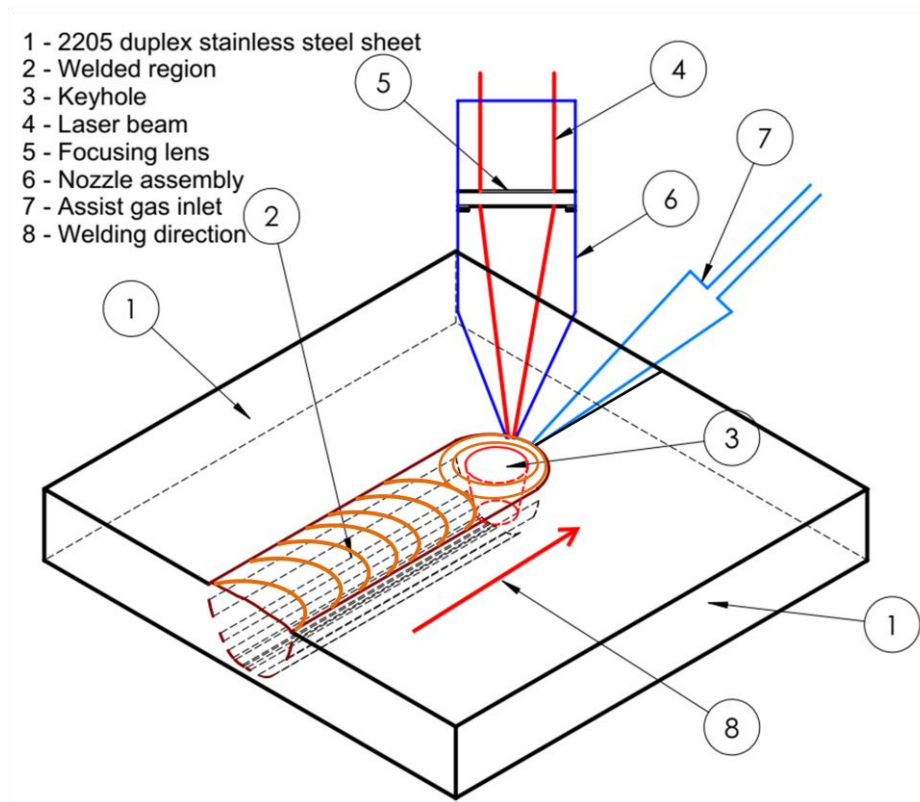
Schematic diagram of the laser butt welding process
